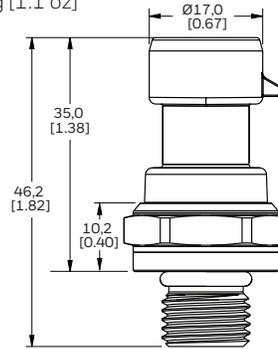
MOUNTING DIMENSIONS (FOR REFERENCE ONLY. MM/[IN])
